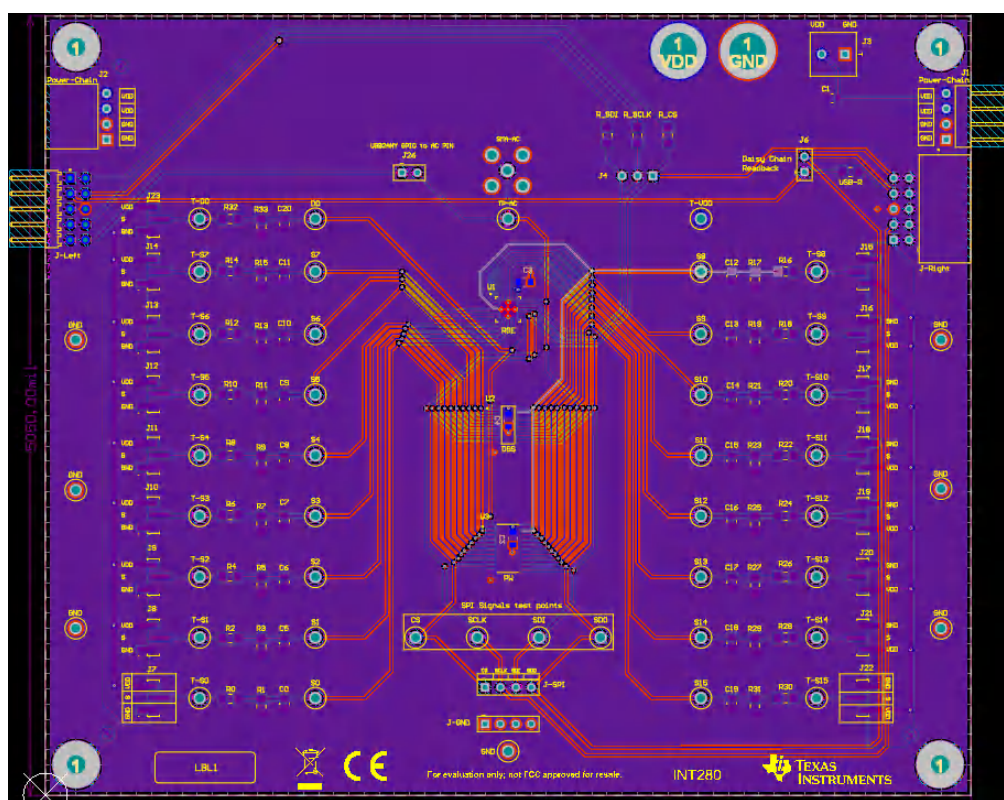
TMUXS1306EVM Bottom Layer Layout
